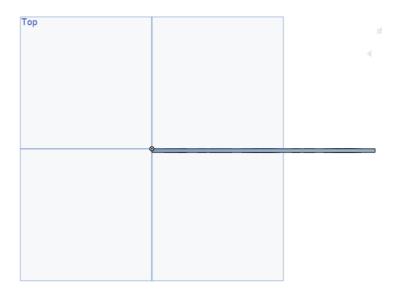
Top Onshape Drawing of Stencil 2 "there" design
